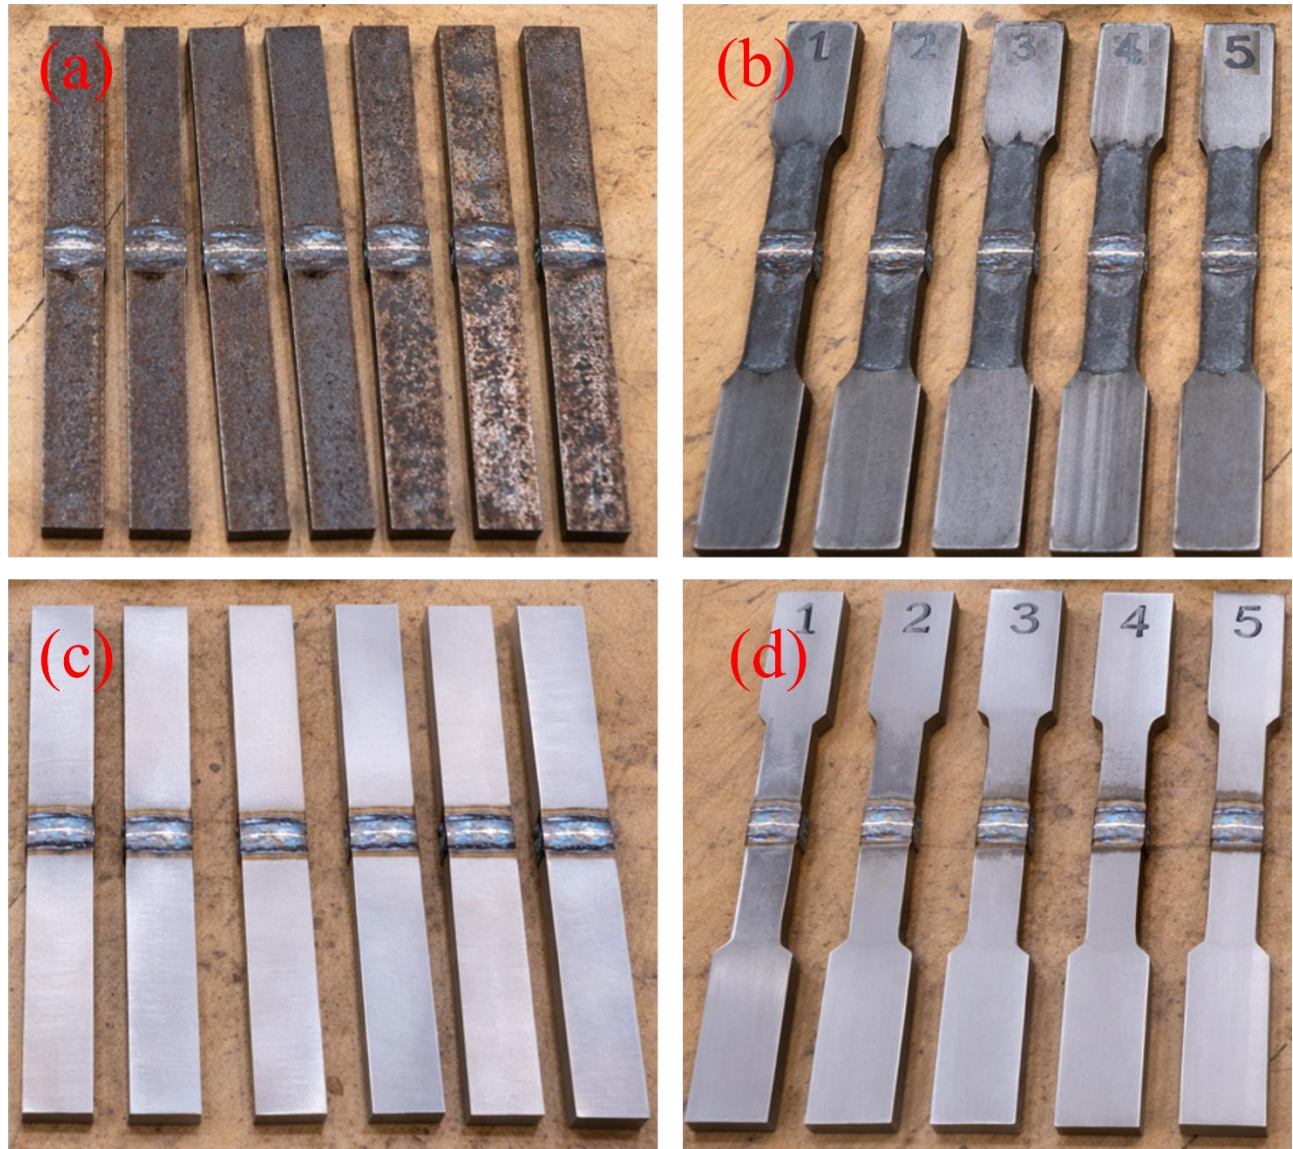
36 Sample prepared for the verification: a) As-welded specimens (before surface finishing), (b) Machined tensile specimens (rough/initial machining stage), (c) Ground and polished welded specimens, (d) Final tensile test specimens (finished and numbered)
